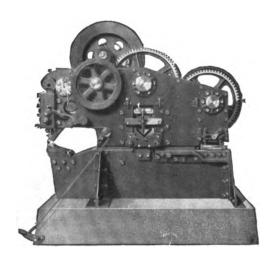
"UNIVERSAL" SLITTING SHEAR, PUNCH, AND BAR CUTTER NO. D25-U
